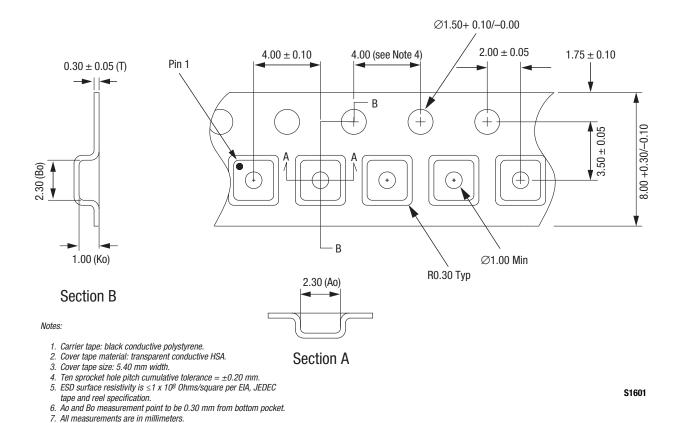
SKY67022-396LF Tape and Reel Dimensions
